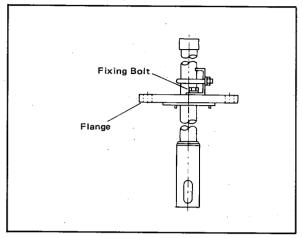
Sensor Holder Removal (Flange Mounting Type without Cleaner).
